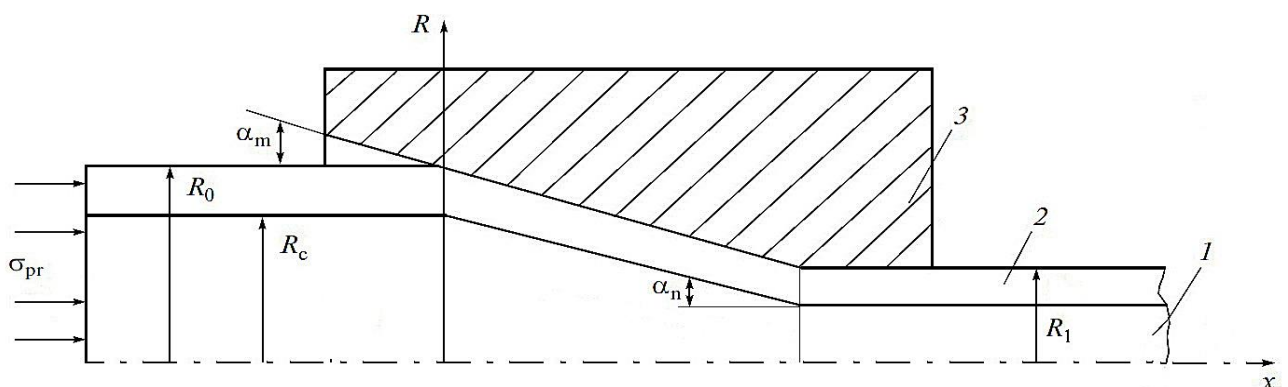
Scheme of pressing of bimetal assembly blank: (1) core; (2) shell; (3) pressing tool.
